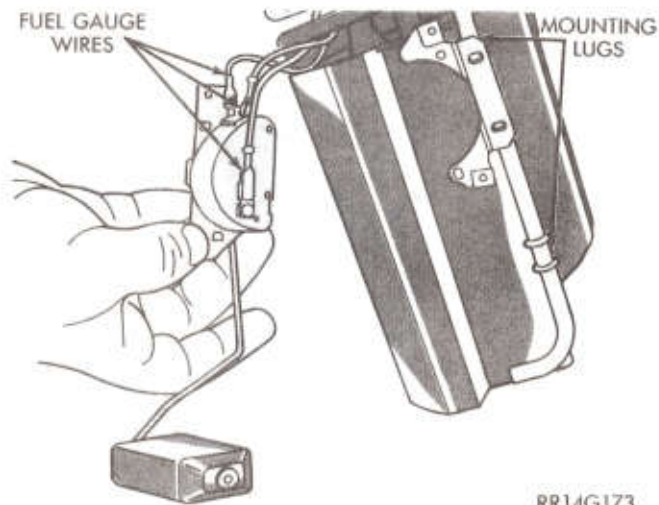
Fuel Gauge Sending Unit Wiring Terminals
